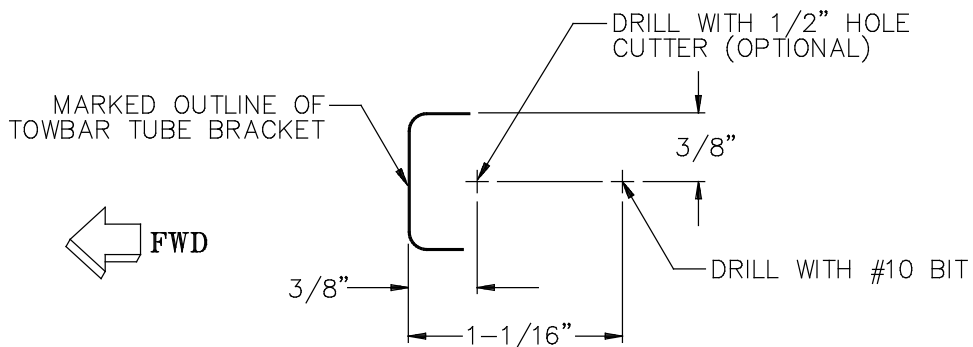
Laying Out the Forward Mounting Screw and Towbar Engagement Pin Holes
